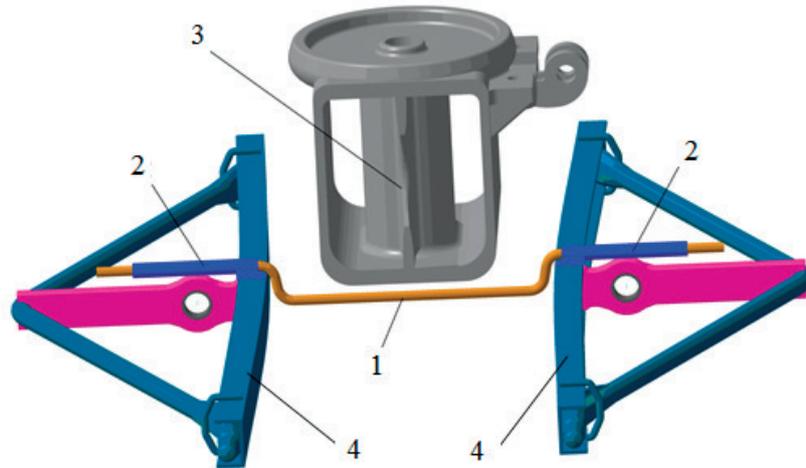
The general view of the device for maintaining uniform clearances between the brake pads and the rolling surfaces of the wheelset
